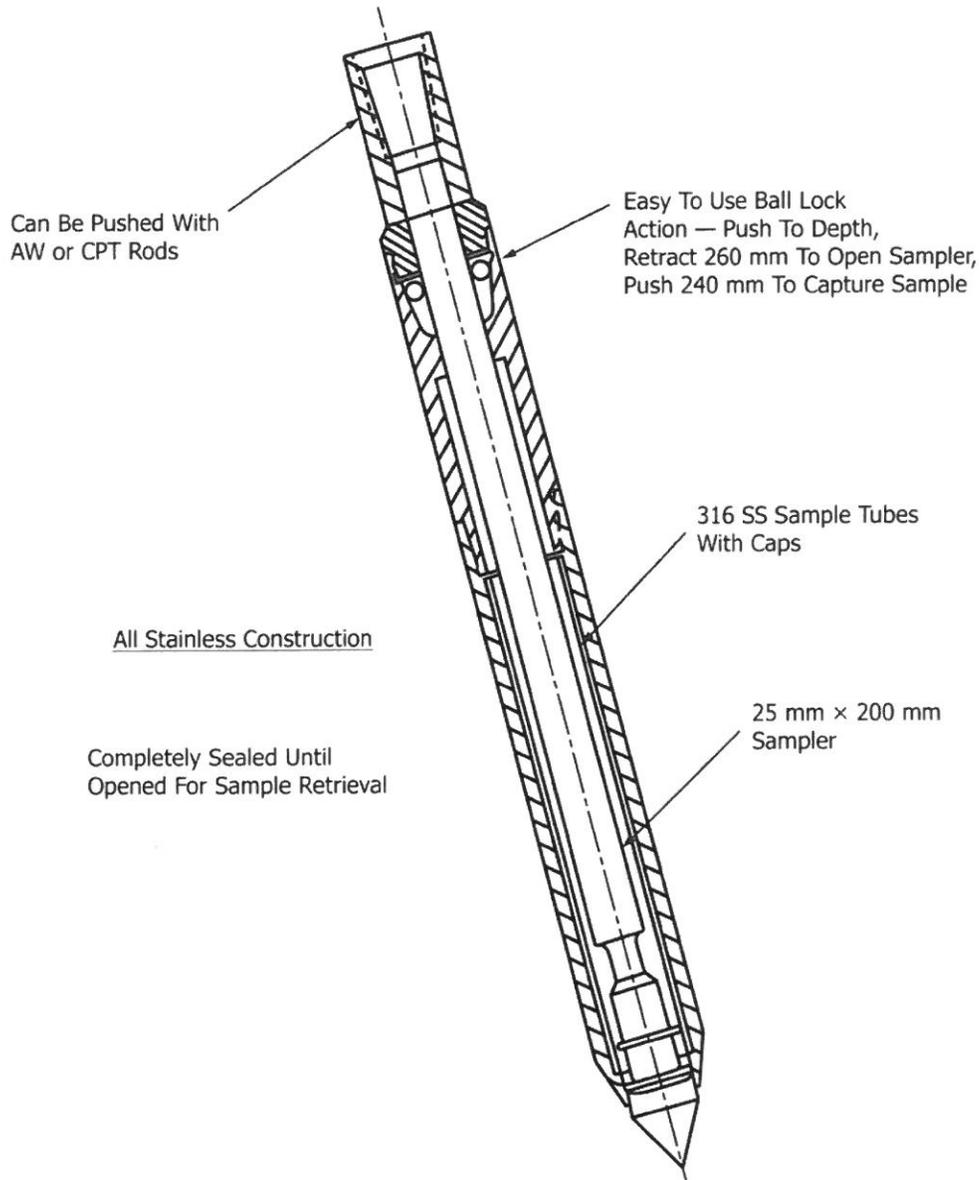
Single Tube Piston Sampler Used on CPT and Drilling Operations
